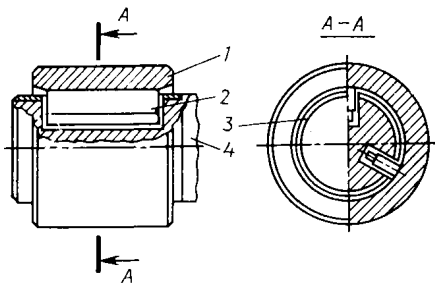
Bearing with solid-lubricant inserts in the shaft
